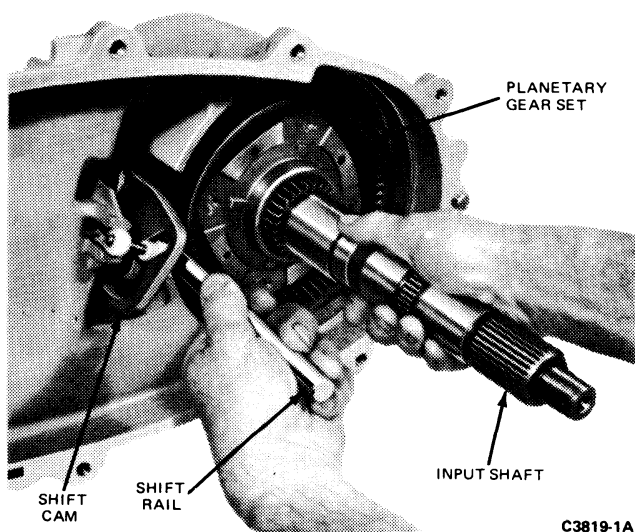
Installing Planetary Gear Set and Shifter Mechanism
